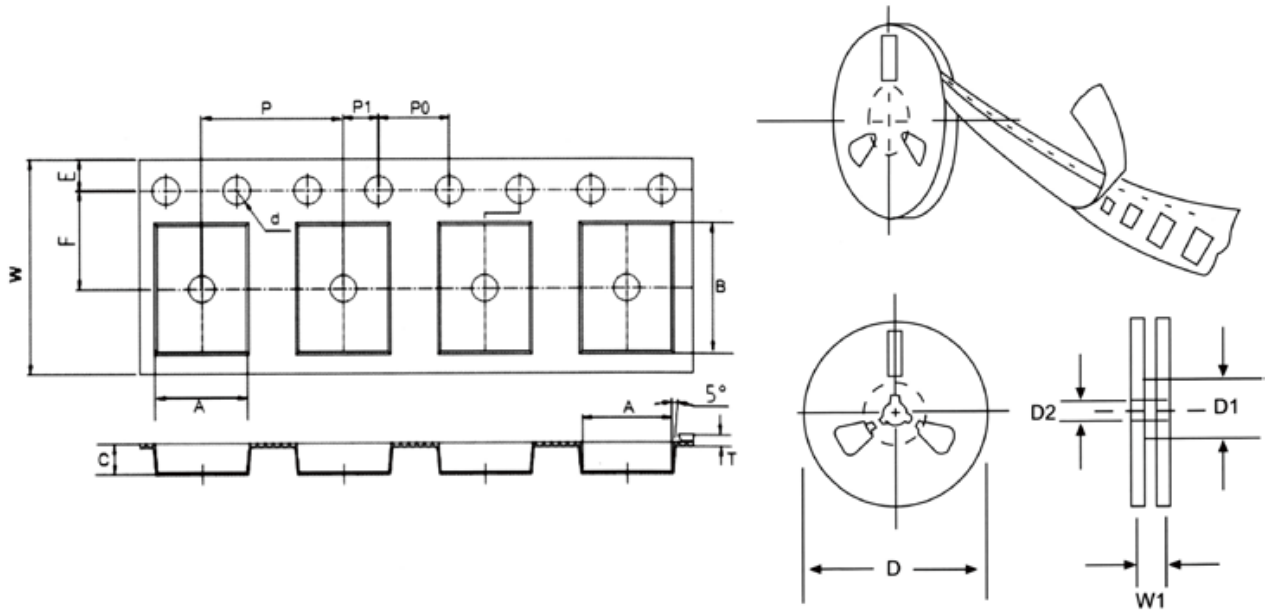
FIG : CONFIGURATION OF SURFACE MOUNTED DEVICES TAPING
